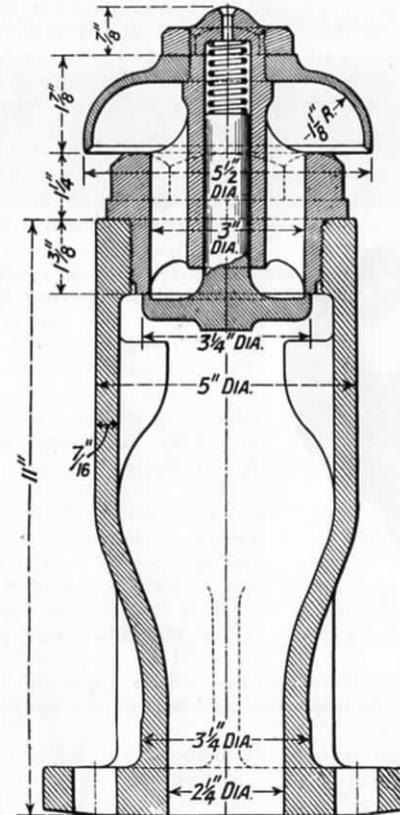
SUPERHEATER HEADER RELIEF VALVE, SOUTHERN RAILWAY.
